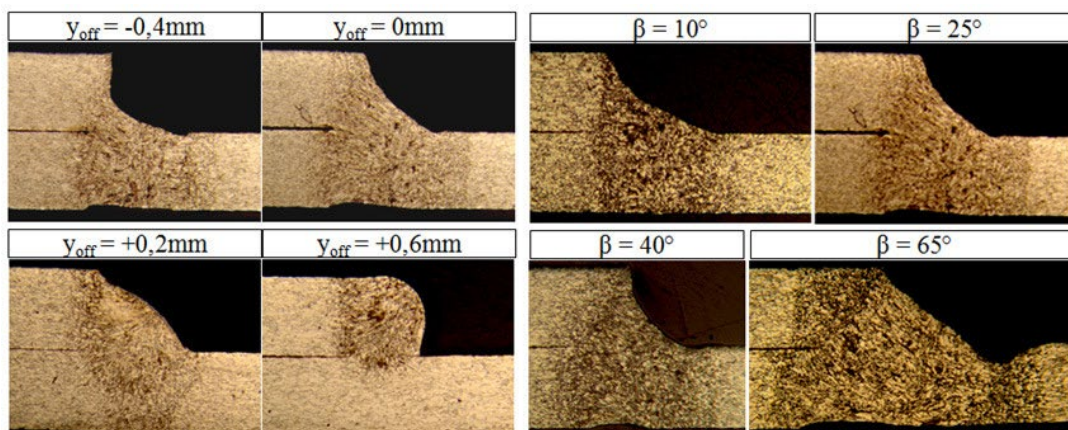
Influence of welding head positioning y_{off} (left) and side tilt of the welding head β (right) on weld geometry ($P_L=1.45$ kW, $v_s=3$ m/min, β (left)= 25° , y_{off} (right)=0 mm, $D_f=640$ μm , $d_B=0.8$ mm, welded steel DX54) [4].
